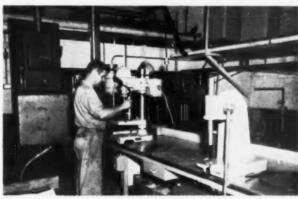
Plating racks and fixtures are made and maintained in Nutmeg's own shop, which is completely equipped for this purpose.
